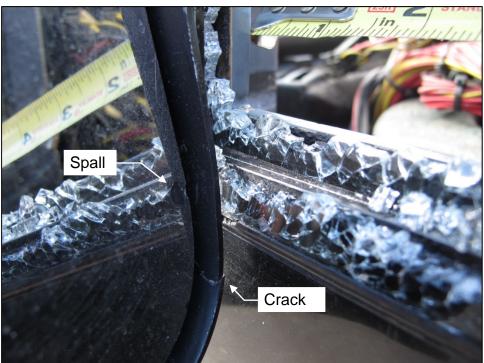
Close view of the inboard lower edge of the left sideview mirror viewed looking forward showing a horizontal crack in the housing and a spall crack at the edge of the mirror.
